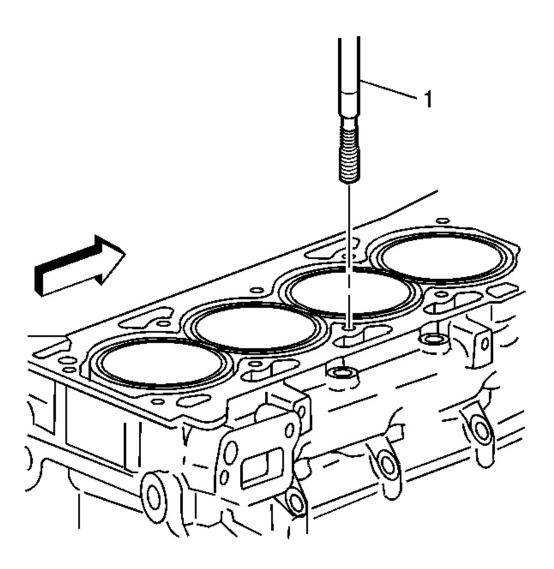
View Of Installation Driver Courtesy of GENERAL MOTORS CORP.
